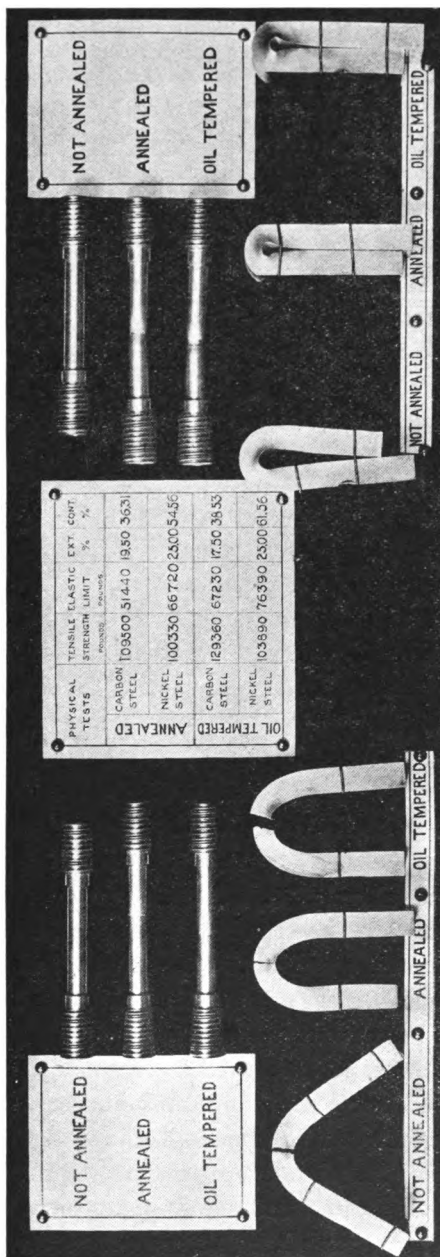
COMPARISON OF CARBON STEEL AND NICKEL STEEL FORGINGS.
